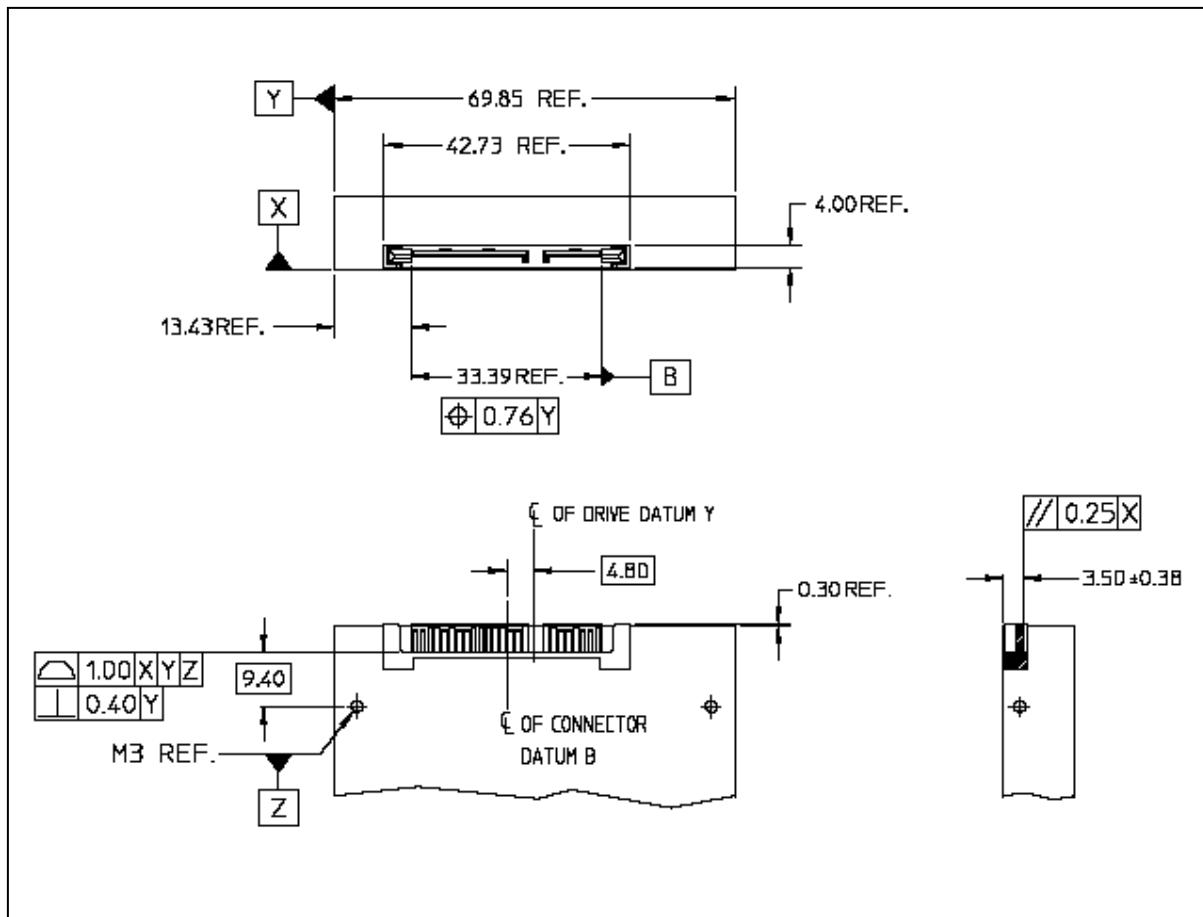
Device plug connector location on 2.5 inch bottom mounted device
